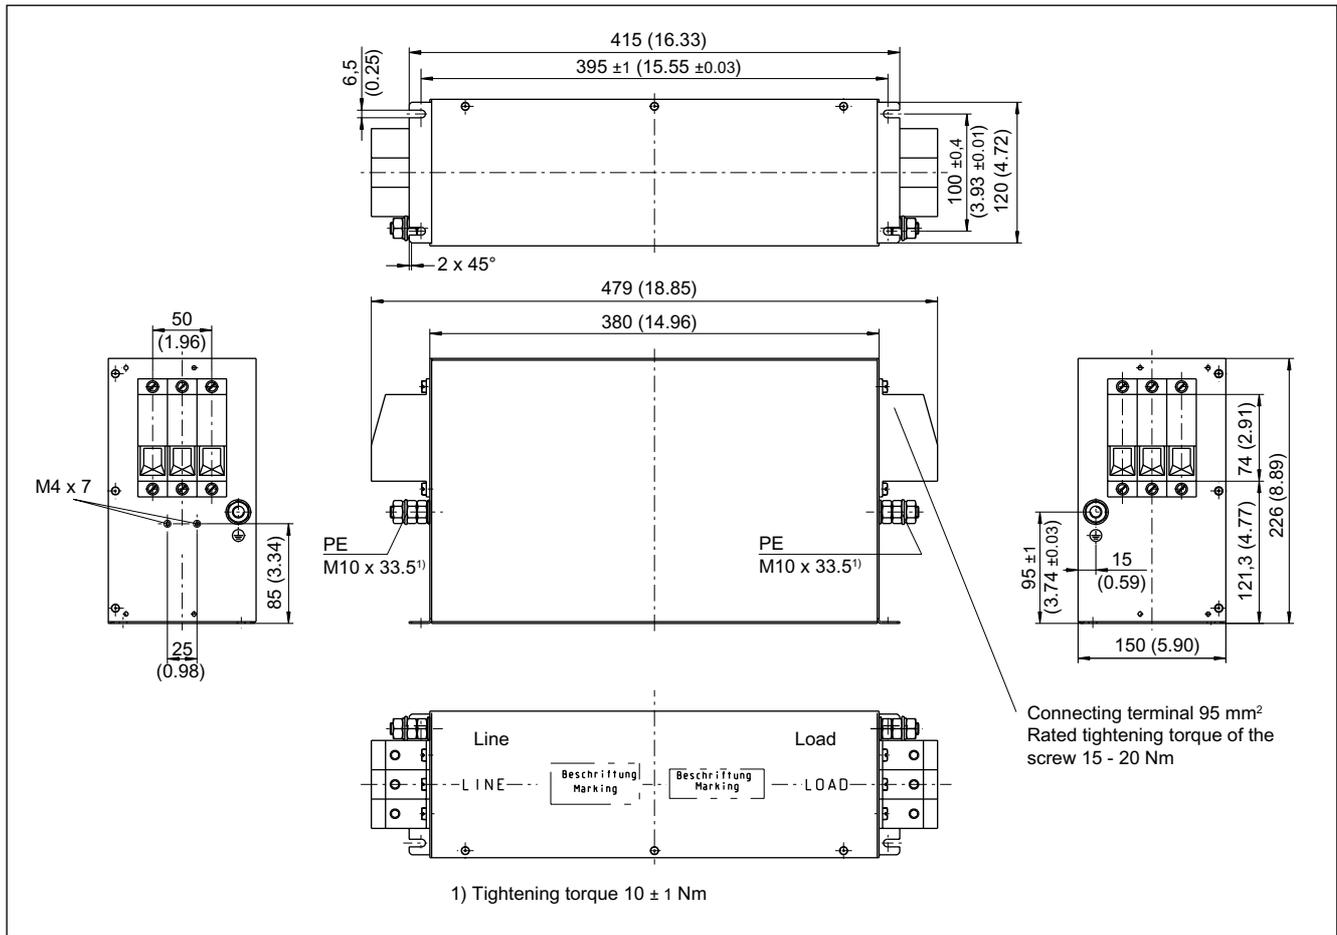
Dimension drawing of Basic Line Filter for Basic Line Modules 100 kW, order number 6SL3000-0BE31-2DAx, all dimensions in mm and (inches)
